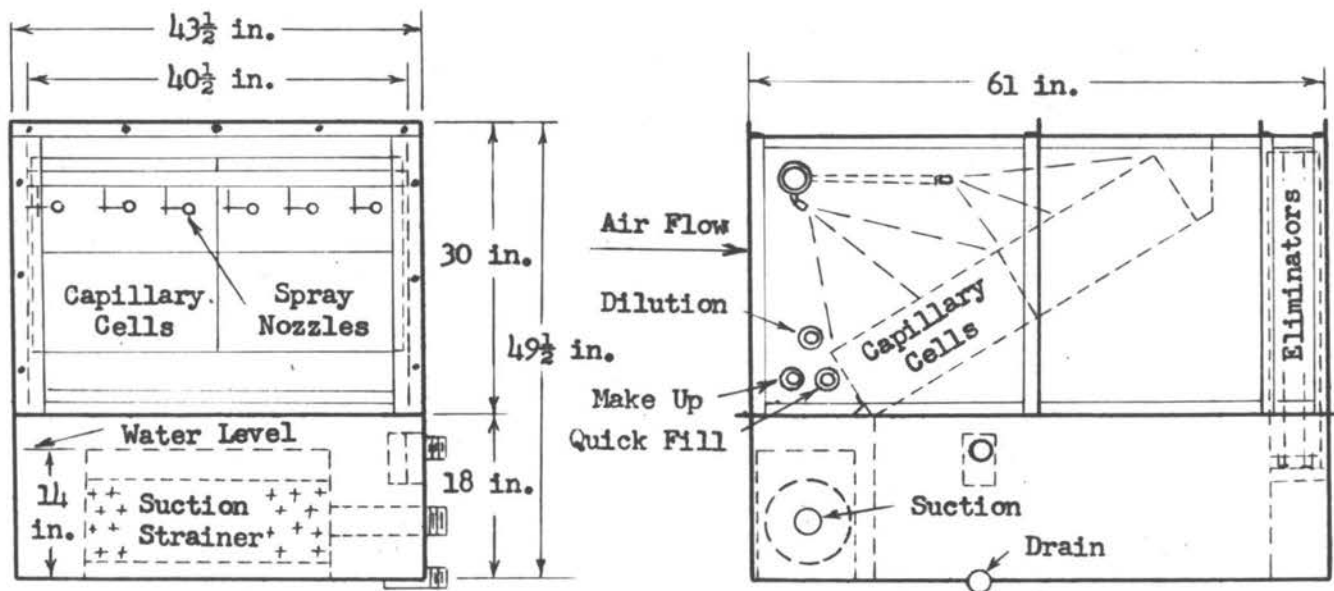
The Capillary Air Washer Dimensions and the Location of Its Integral Parts
